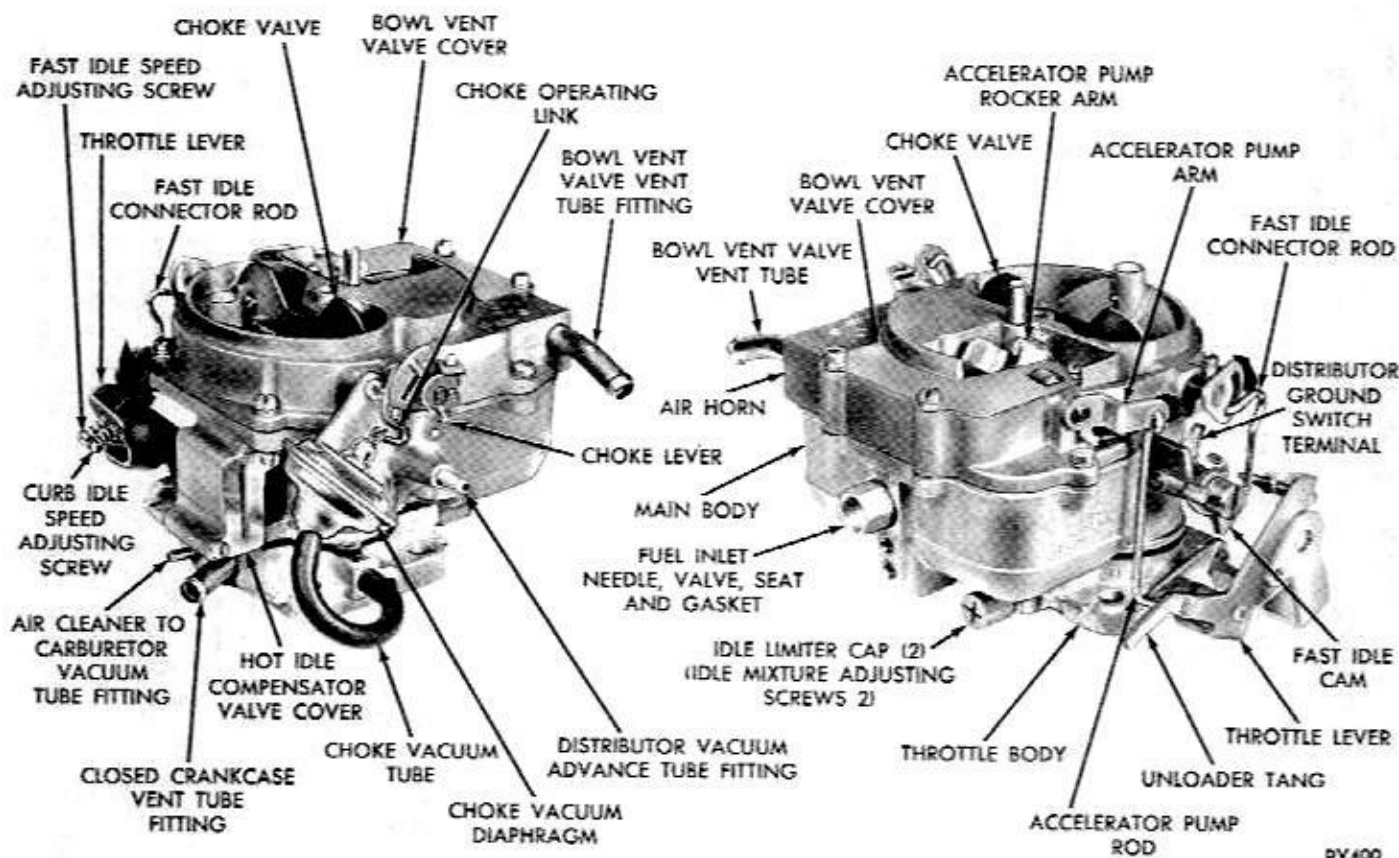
Carburetor Assembly (BBD-1-1/2 inch) E.C.S.
